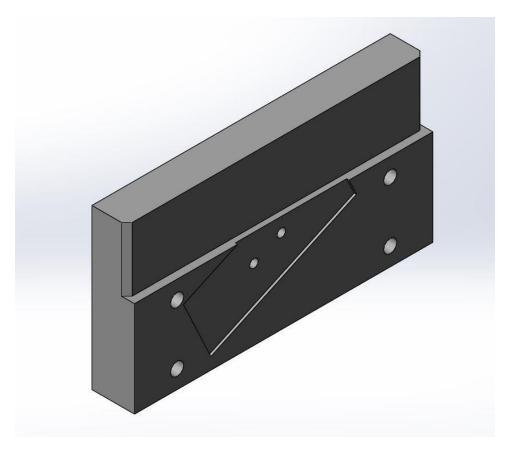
Conveyor Belt Slicer Version 2, Halve-A
